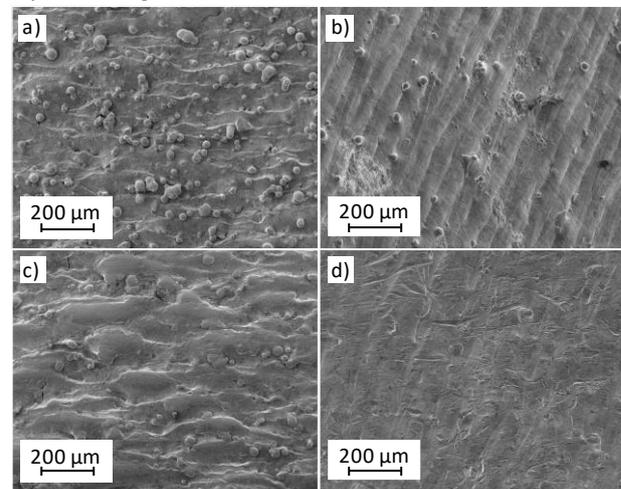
SEM images of the cylindrical surface M before (a) and after (c) tangential ANNF-assisted finishing (configuration 2), and the end surface E before (b) and after (d) axial ANNF-assisted finishing (configuration 1)
